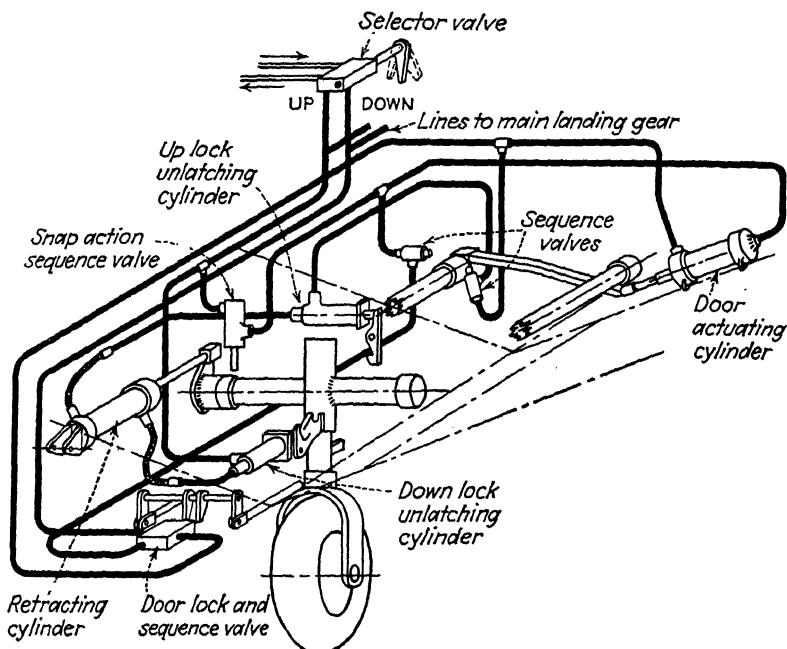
Hydraulic retracting and locking system for typical nose-landing gear.
